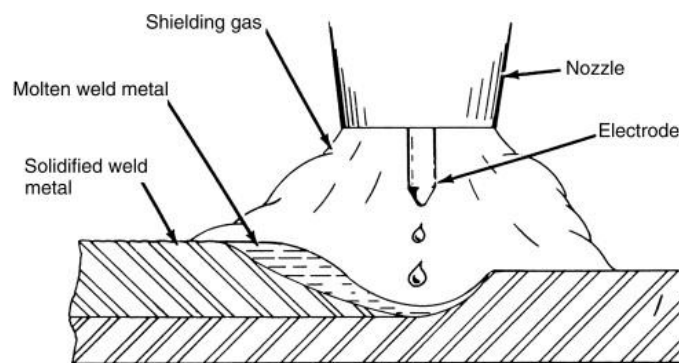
Schematic illustration of welding area in GMAW [Has14].
